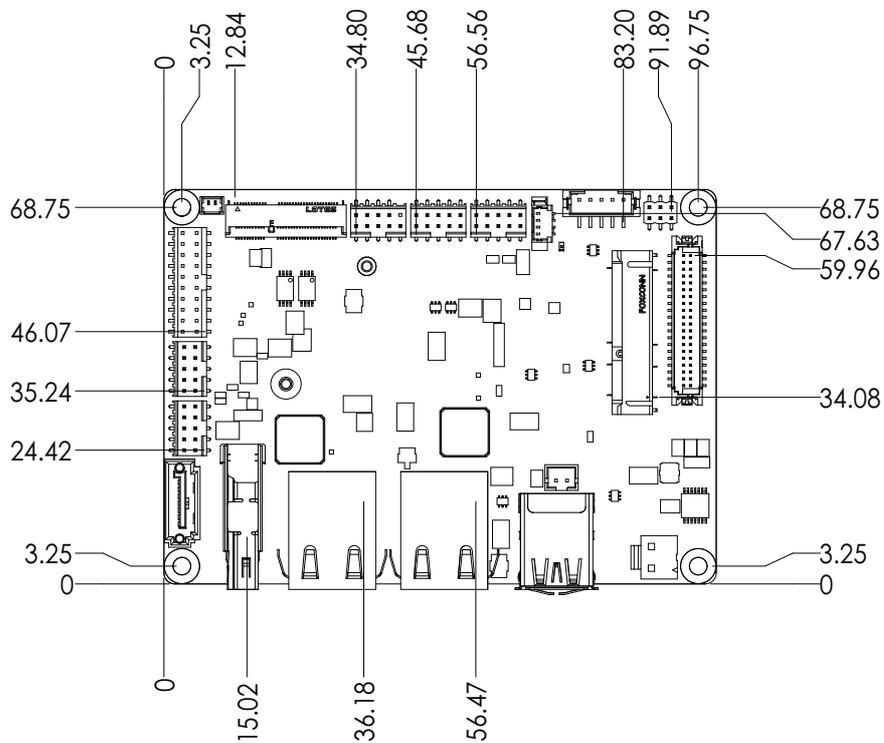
MIO-2361 Mechanical Drawing (Bottom Side)
